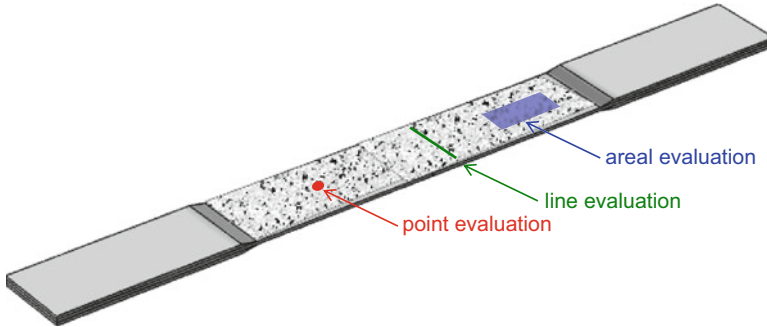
Drawing of typical tensile test specimen and scheme of possible strain component evaluations using DIC
